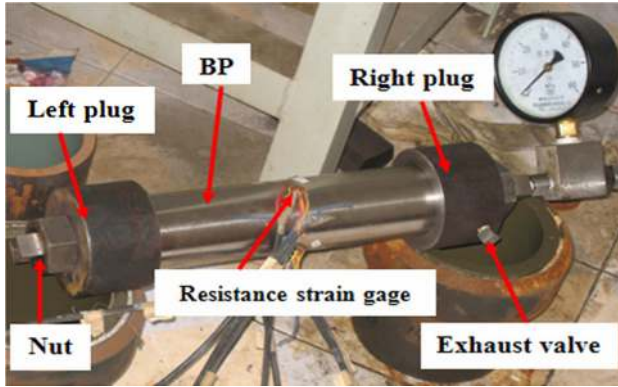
The sealing arrangement of hydraulic forming for bimetal-pipe
